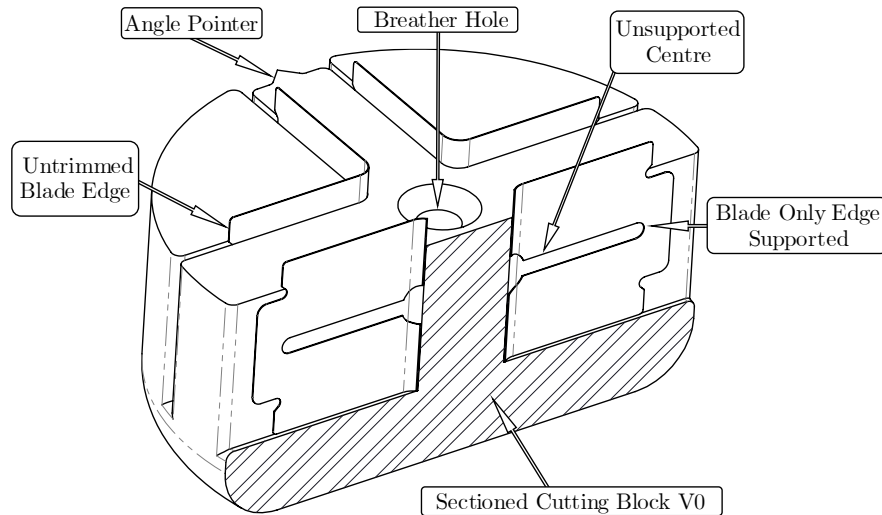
Section-view of the first cutting block with unsupported & untrimmed blades.
